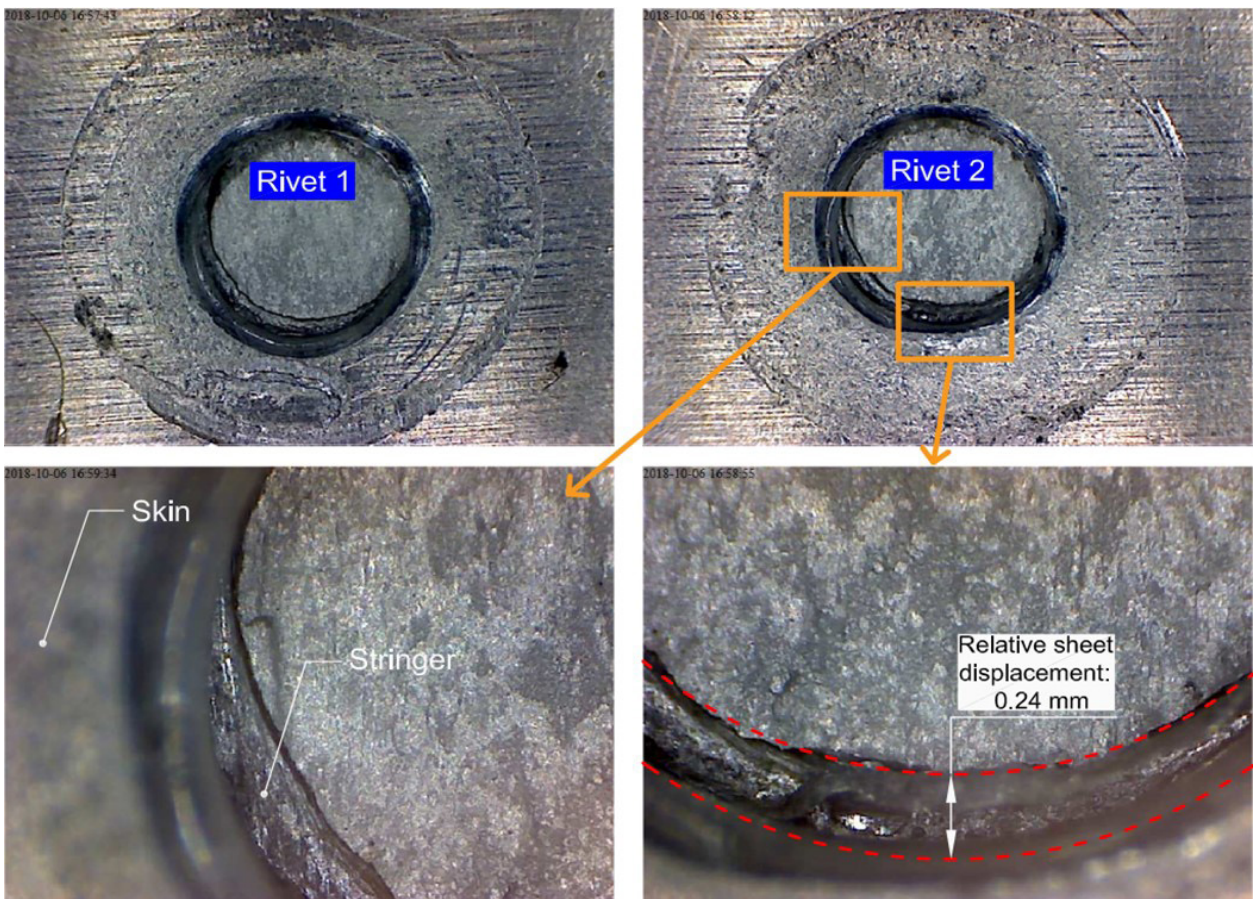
Macroscopic images of the sheared surfaces of the rivets showing the relative displacement of the joined sheets
